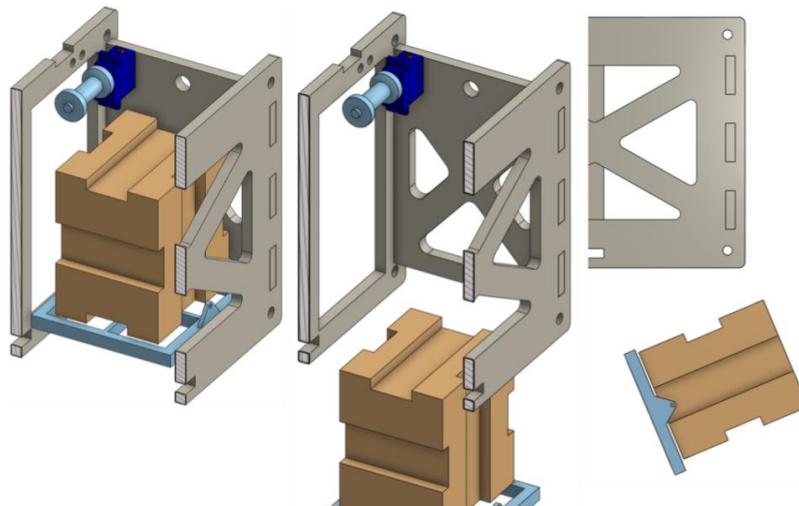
Detail CAD Design of payload deployment mechanism with payload
